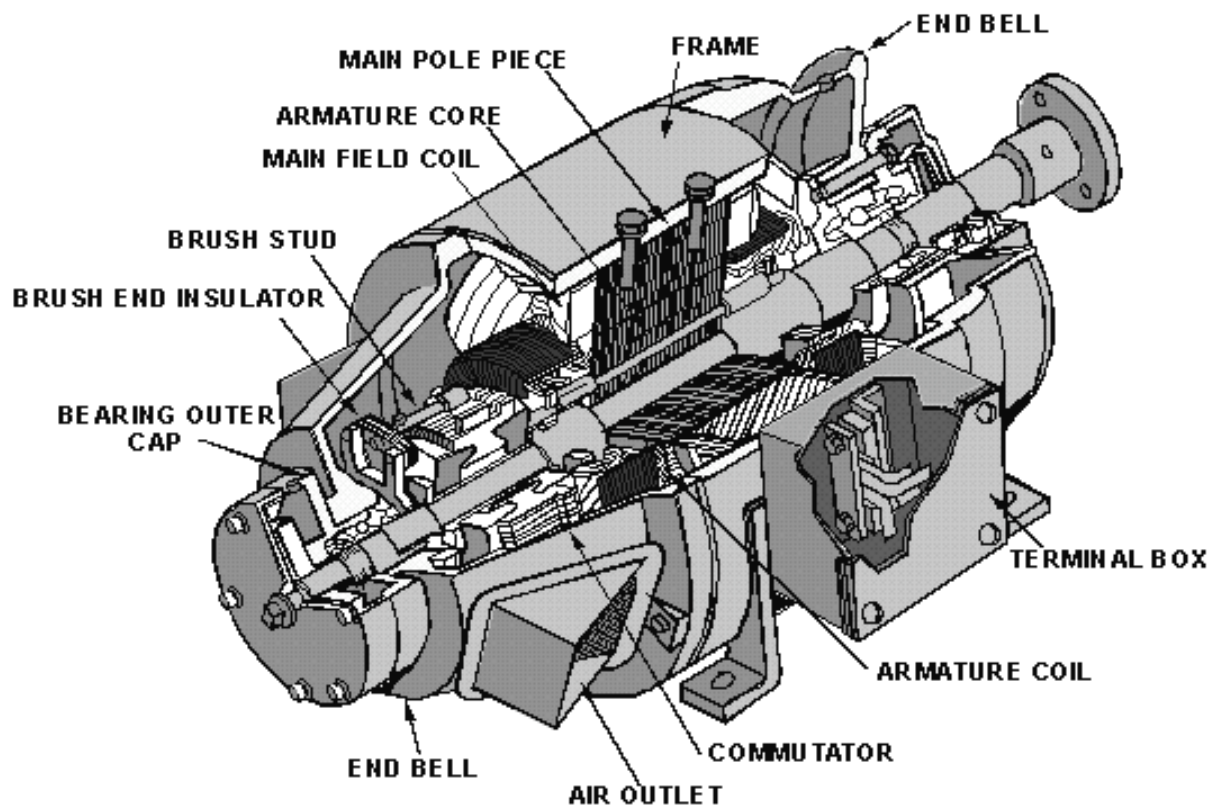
Construction of a dc generator (cutaway drawing).
